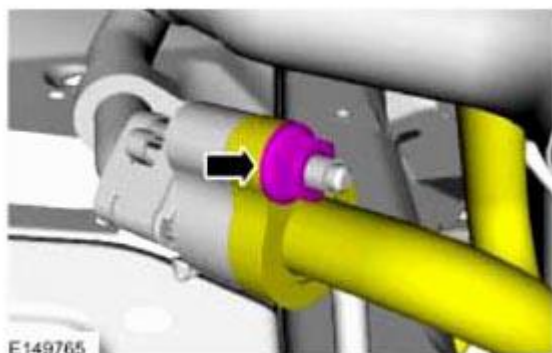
Locating AC Pipe Nut And O-Ring Seal
